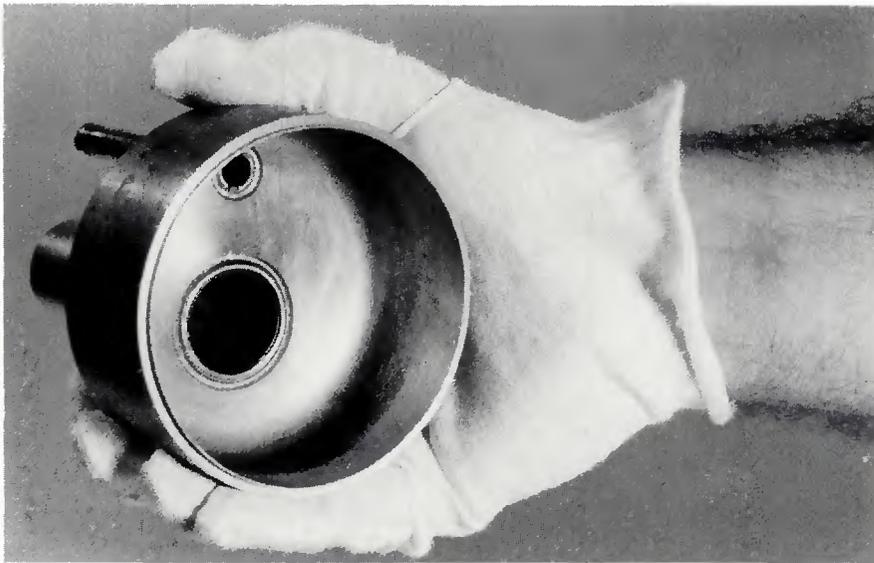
Back extruded half section with two tube-to-header welds made by the EB process
